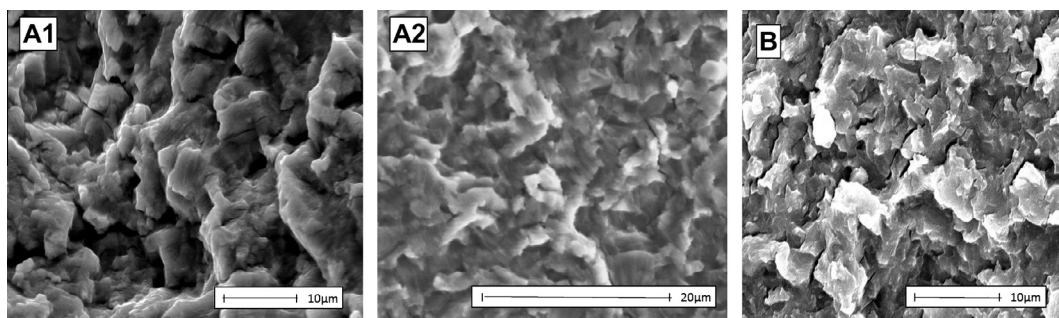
Fracture surface topography of Ti-6Al-4V dental implants. (A1) Fractograph taken from retrieved implants. (A2) Fractographs taken from retrieved implant. (B) Fractograph of Ti-6Al-4V dental implants fractured in lab conditions, tested in room air. The load magnitude was 714 N and the number of cycles to failure was 157,790. Note the high resemblance of the in vivo and in vitro fracture surface topographies.
